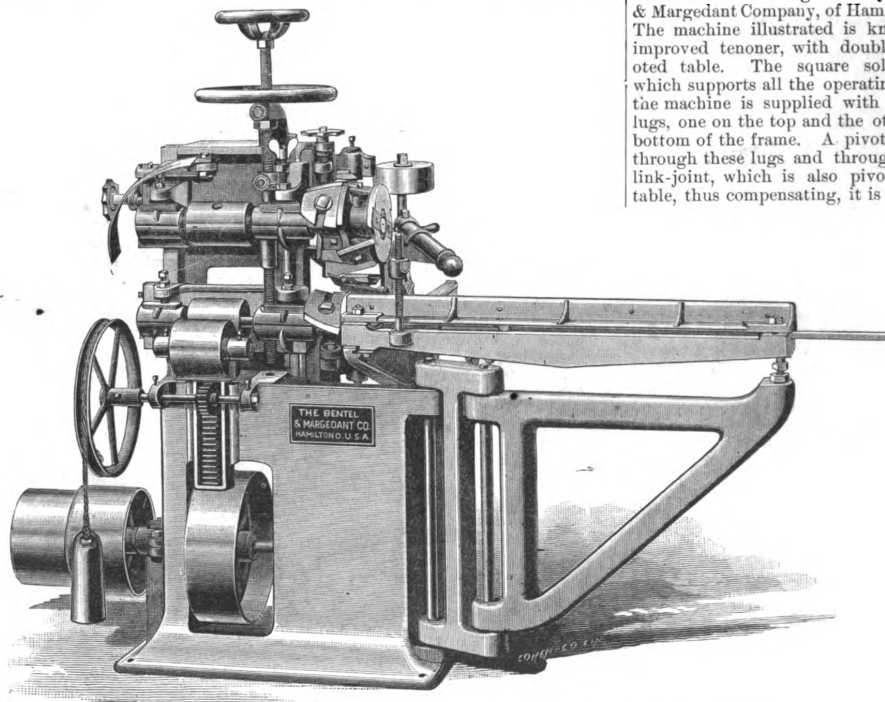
Tenoning-Machine, Manufactured by the Bentel & Margedant Company.
